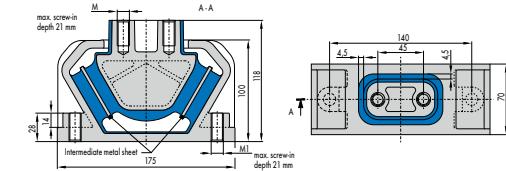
Tapered Mounts 033 18 700, 033 18 701
